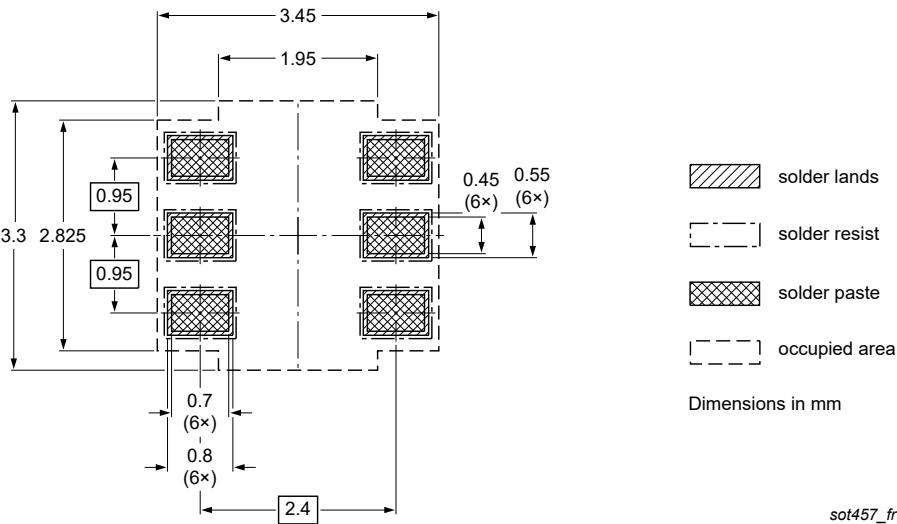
Reflow soldering footprint for TSOP6 (SOT457)
